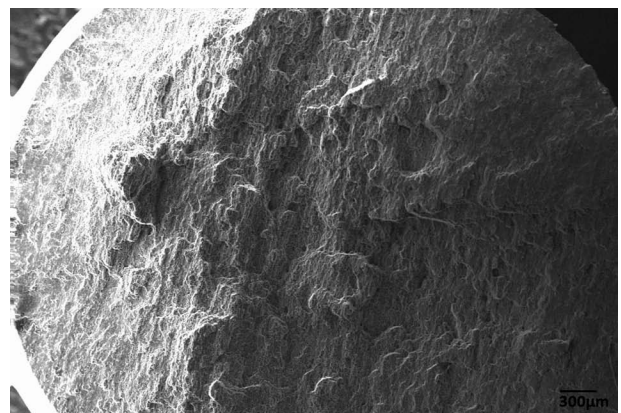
Fracture surface of a room temperature tensile-tested specimen of aluminum alloy AA 7075-T7352 taken at low magnification
